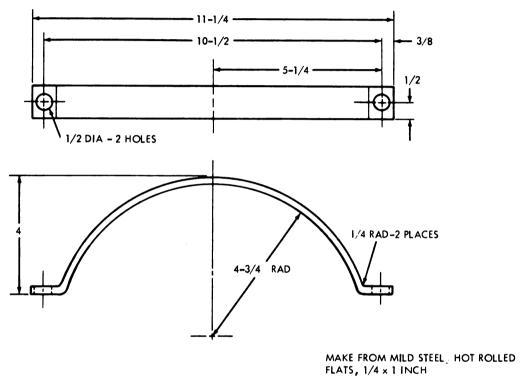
Installation tool — power pack pump dc motor (2 of 3)
